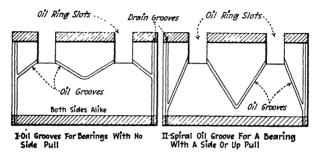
Sections of bearings showing the oil grooves cut in the sides to aid in lubrication.
